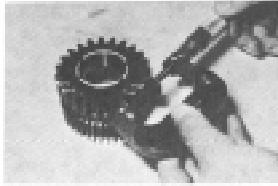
Checking Displacement over a Given Number of Teeth of a Gear.
